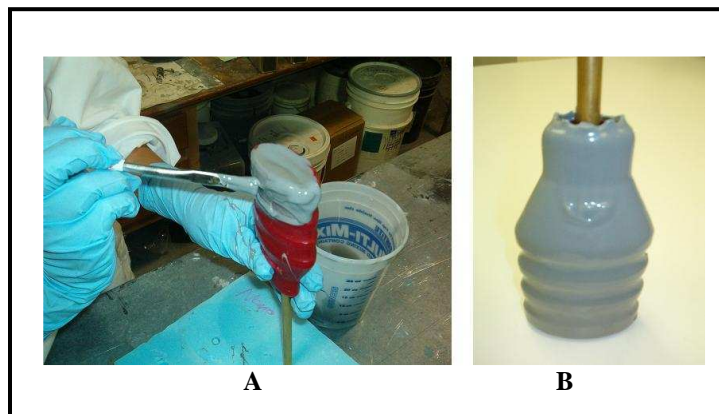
A) Coating of Wax with Rubber B) Coated Rubber Bottle
